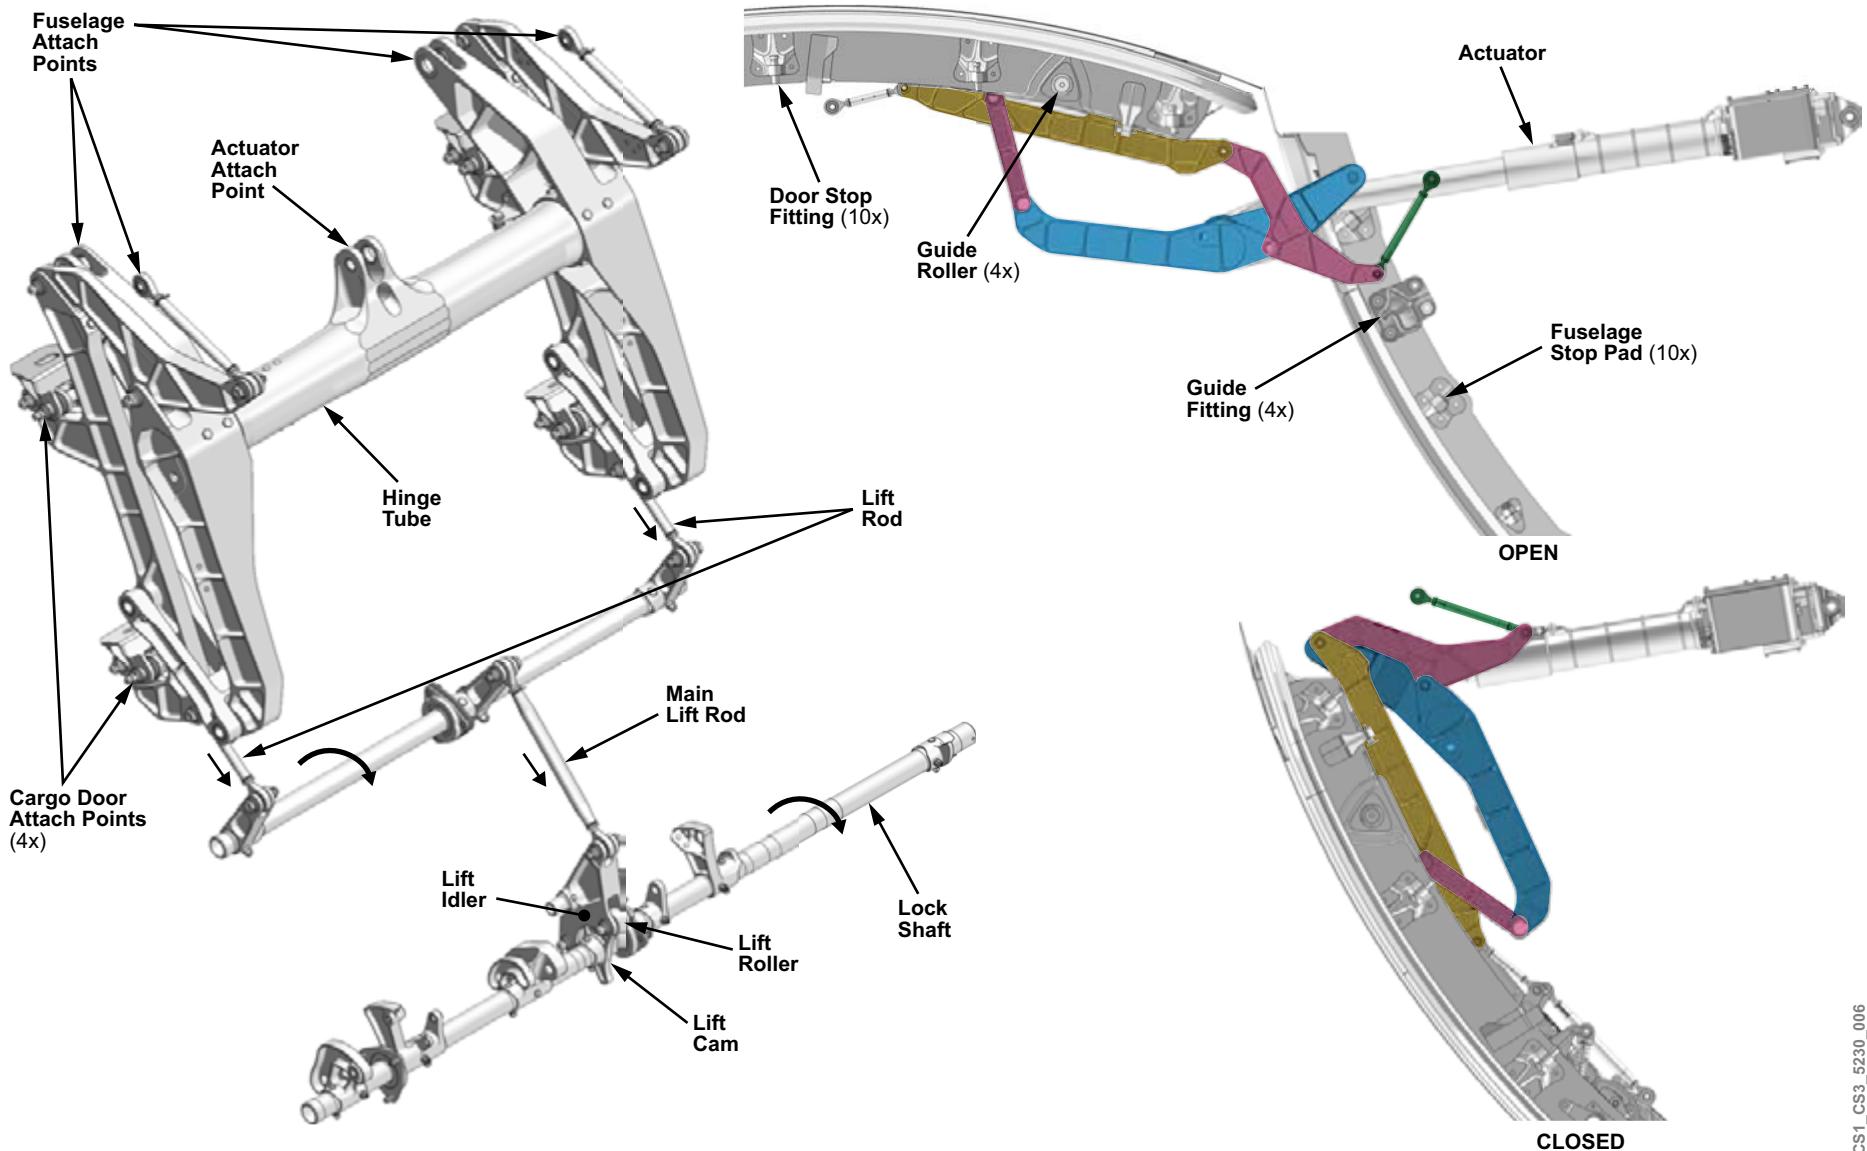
Lifting Mechanism and Cargo Door Hinge Mechanism
